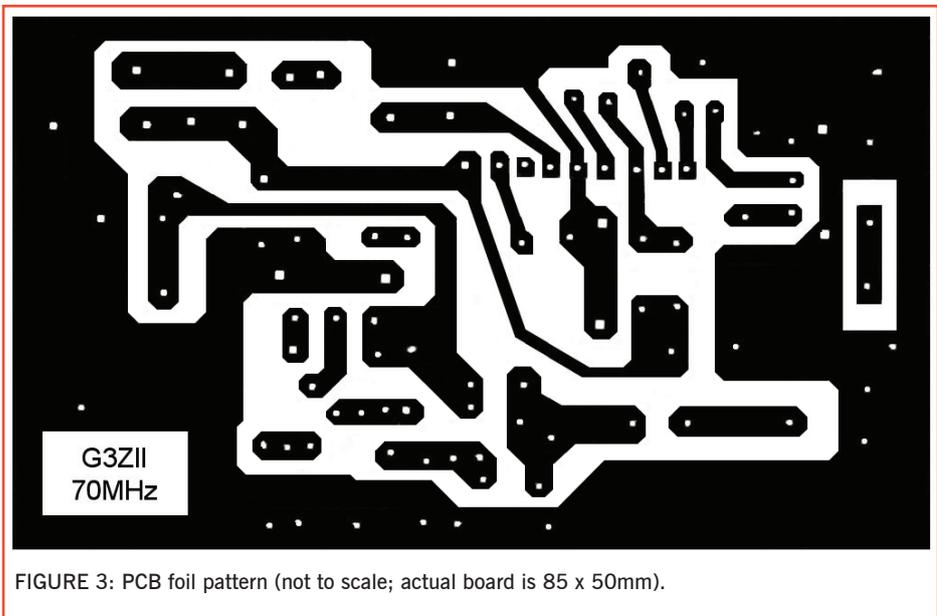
PCB foil pattern (not to scale; actual board is 85 x 50mm).
